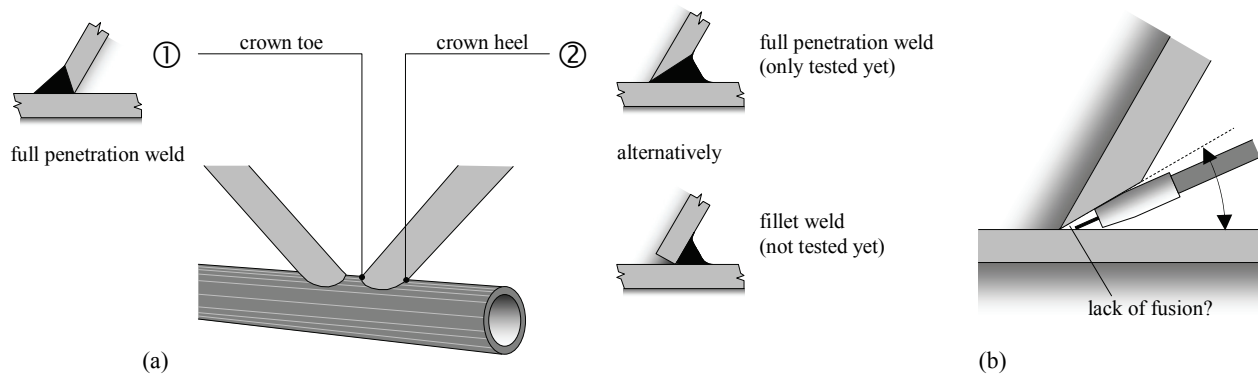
Weld configuration of thickwalled K-joints (a), welding problems in case of a full penetration weld at the crown heel (b)
